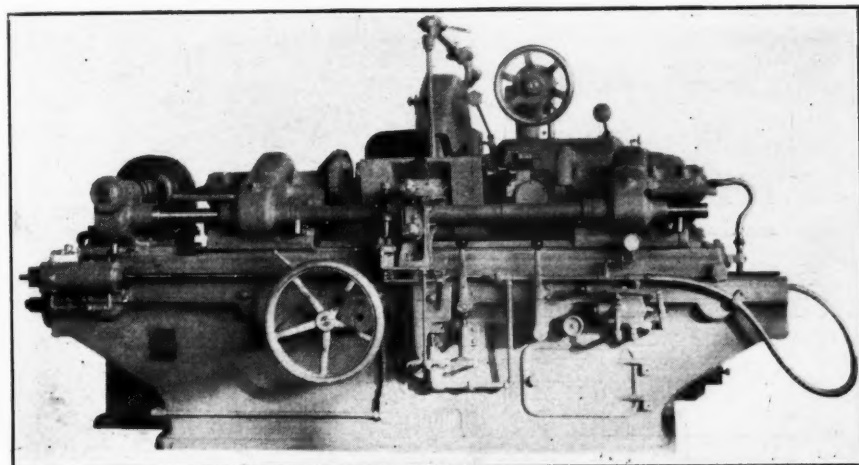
Landis crankpin grinding machine, front view, with six-cylinder crankshaft in position
